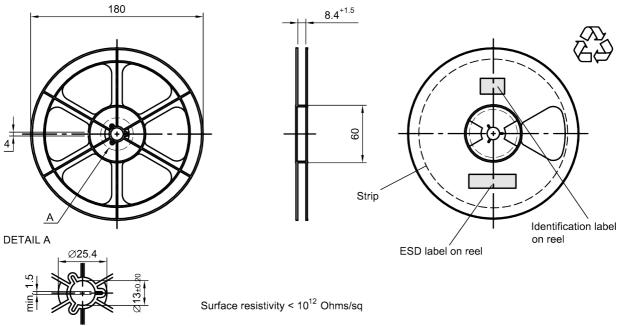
Drawing of reel (first-angle projection) with diameter of 180 mm.
